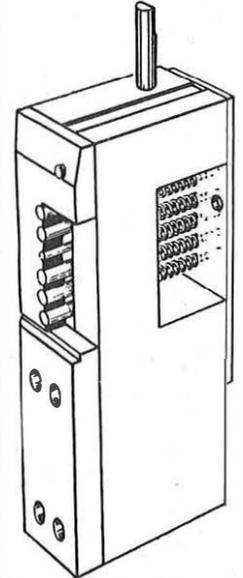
DIE PLATE OF PRINTING REPERFORATOR, NO. 1.
